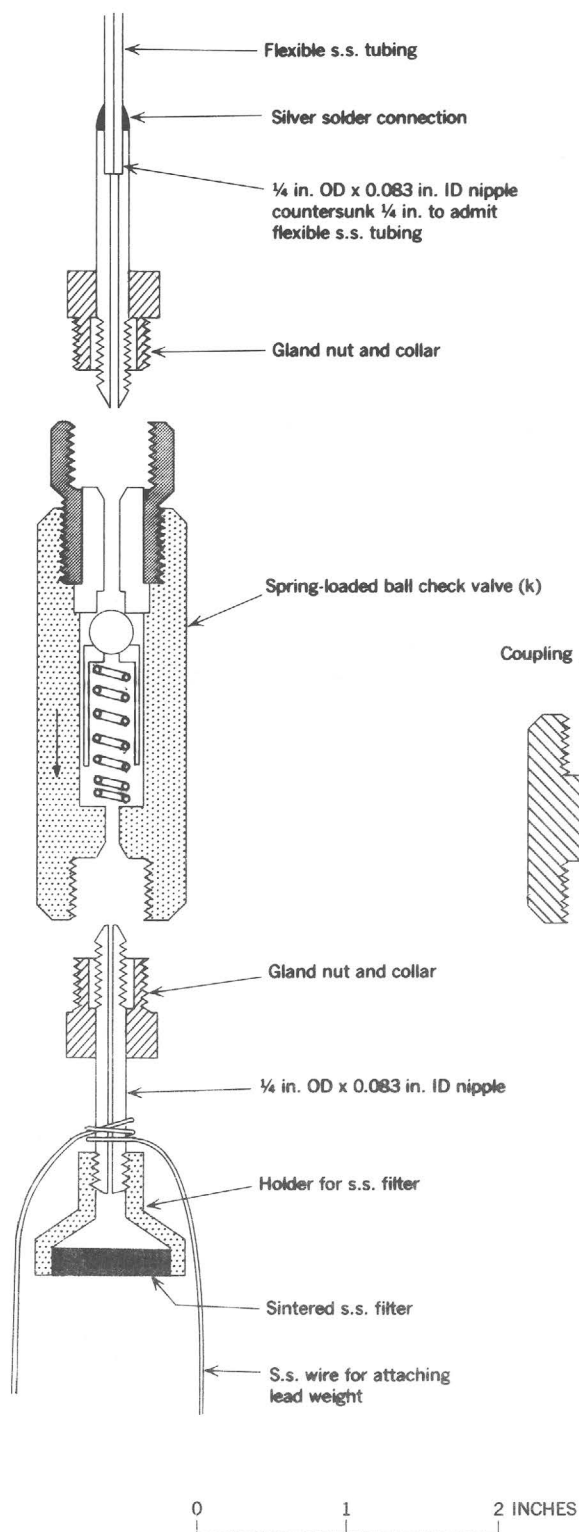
Detail of check-valve assembly and holder for stainless-steel filter.
